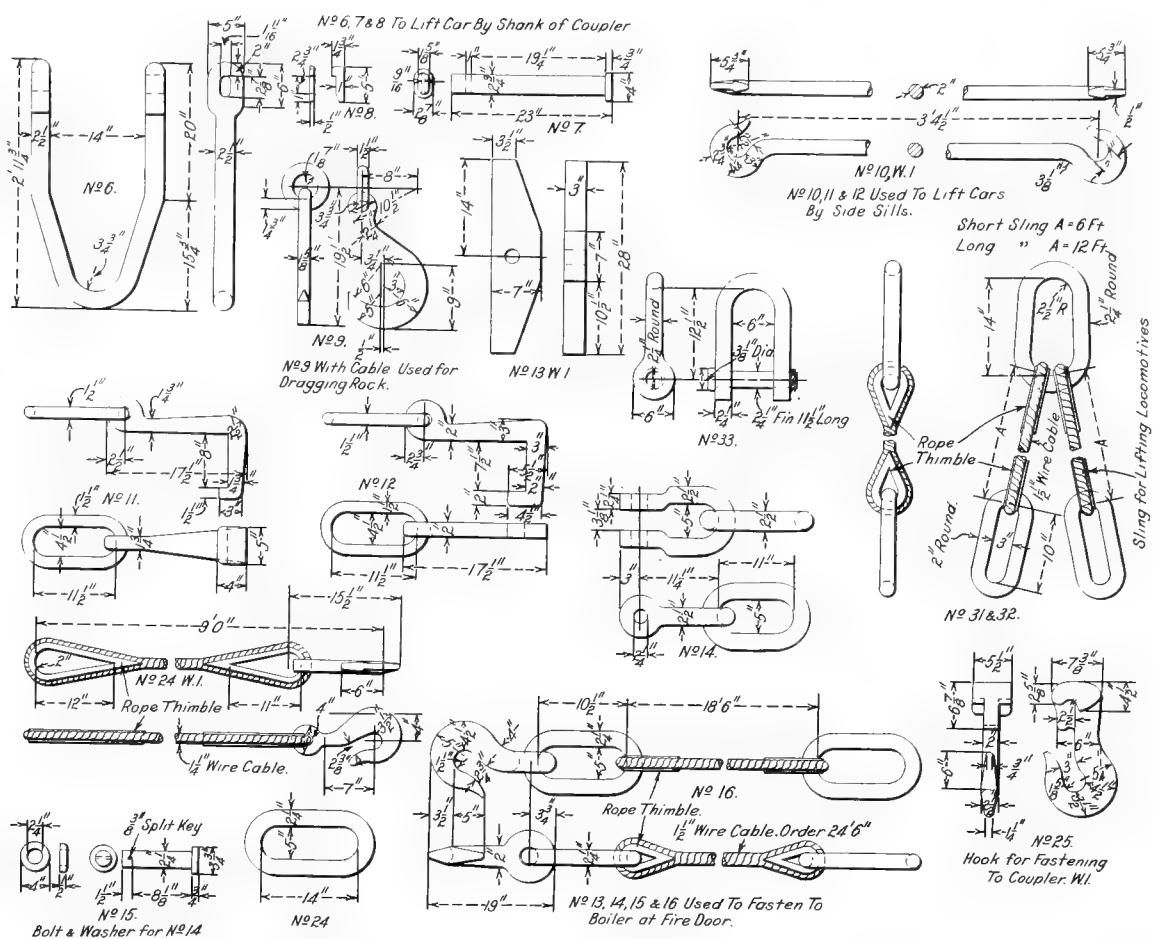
Chicago, Burlington & Quincy Wreck Tram Tools.
